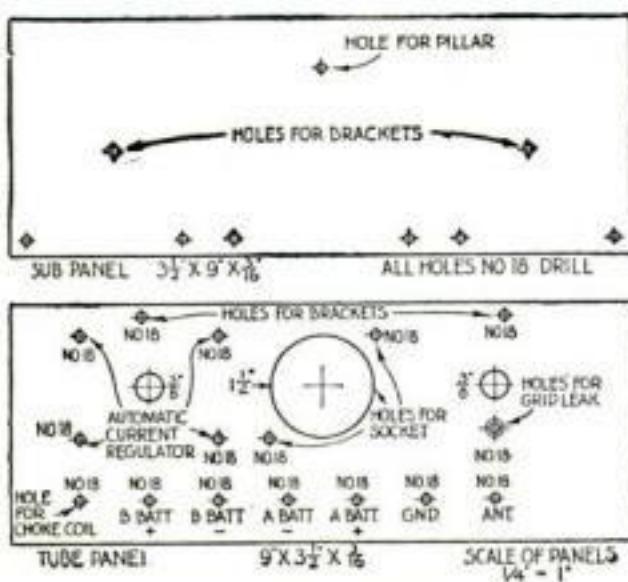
Dimension drawing of front panel with exact measurements for drilling, on scale of $\frac{1}{4}$ to 1 inch
